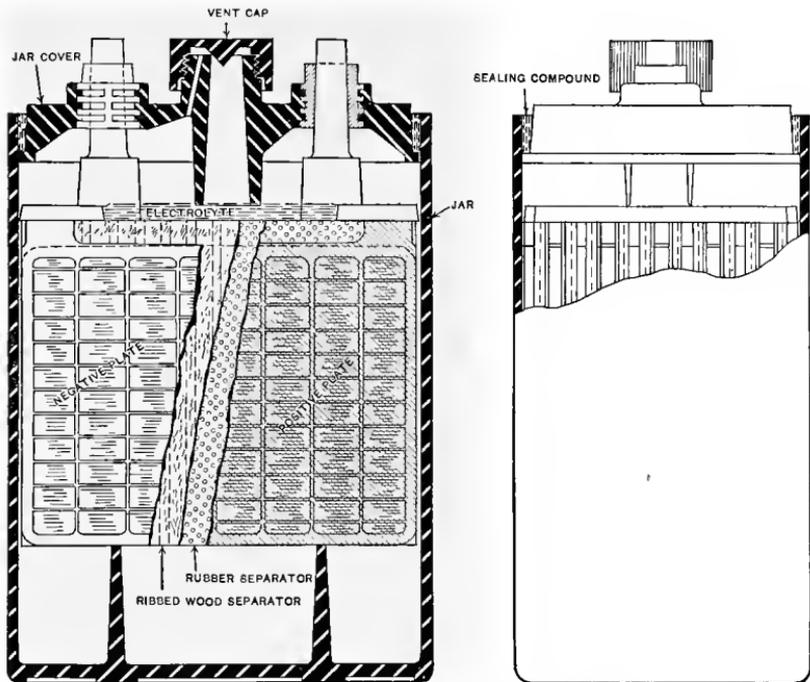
“U-S-L” Unit Assembly Type Cell.
